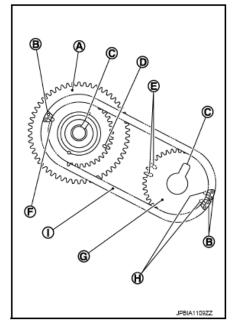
Identifying Matching Marks On Camshaft Sprocket And Timing Chain (Intake And Exhaust Sides)
